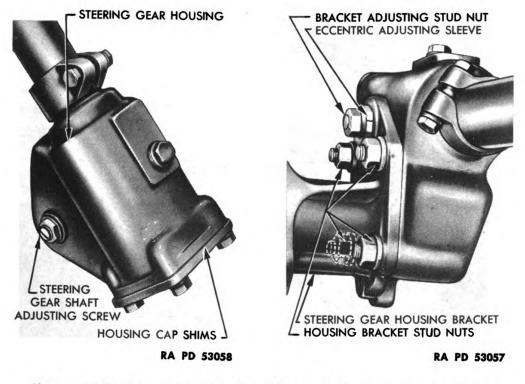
Worm and Shaft Figure 187—Worm and Sector End Play Adjustments Mesh Adjustment
